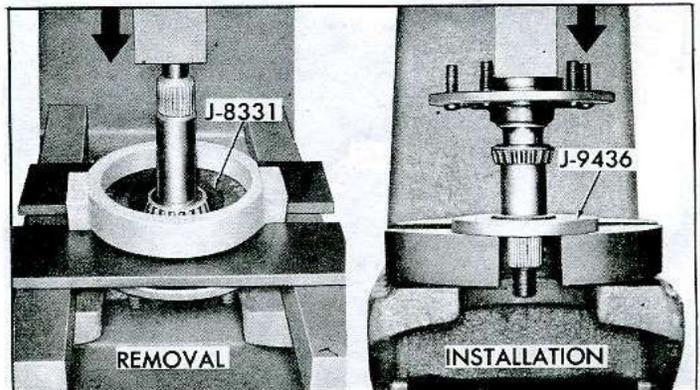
Removing and Installing Drive Spindle Outer Bearing
